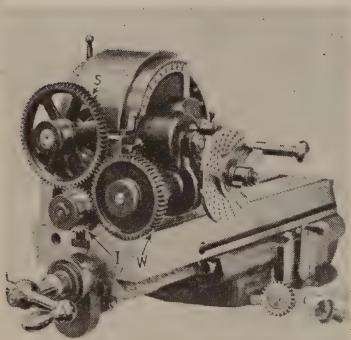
Brown & Sharpe index head geared for 271 divisions.
